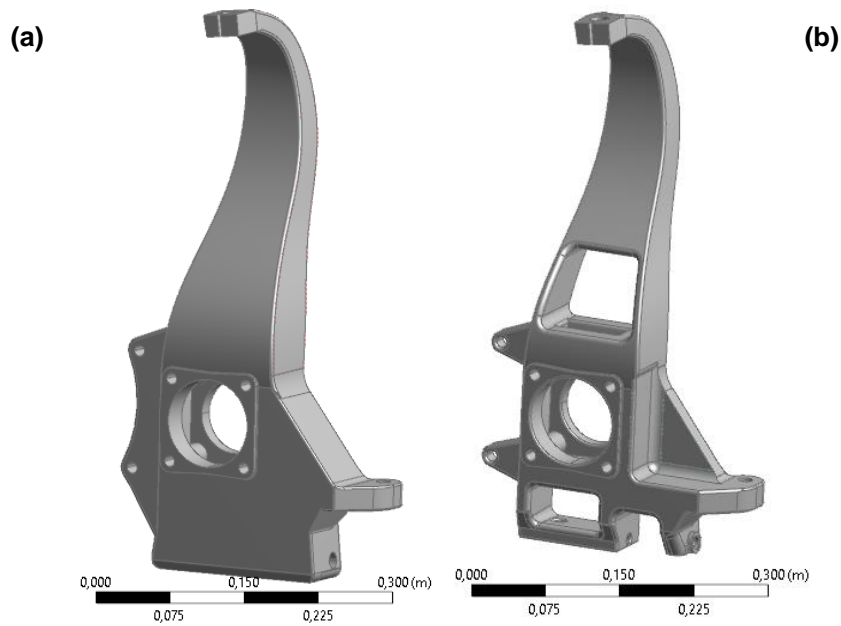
Original geometry (a) and optimized geometry (b) of the steering knuckle.
